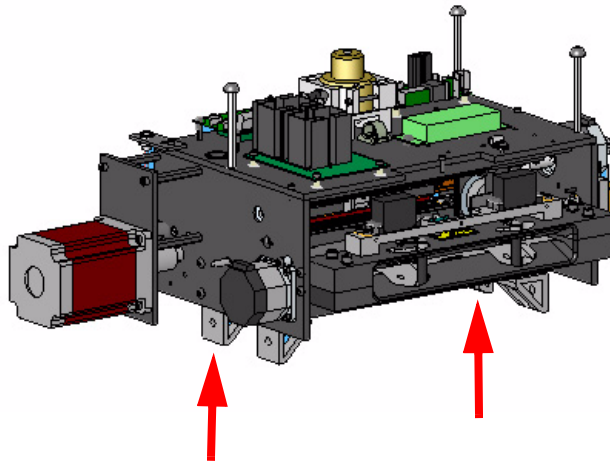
Remove the two M8 screws that secure the Heater Welder Assembly to the supporting brackets.
